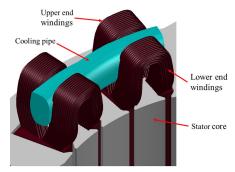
Cooling of the winding ends by an inserted circumferential pipe containing either a cooling channel or a heat pipe, splitting the winding ends in upper and lower part [49].
